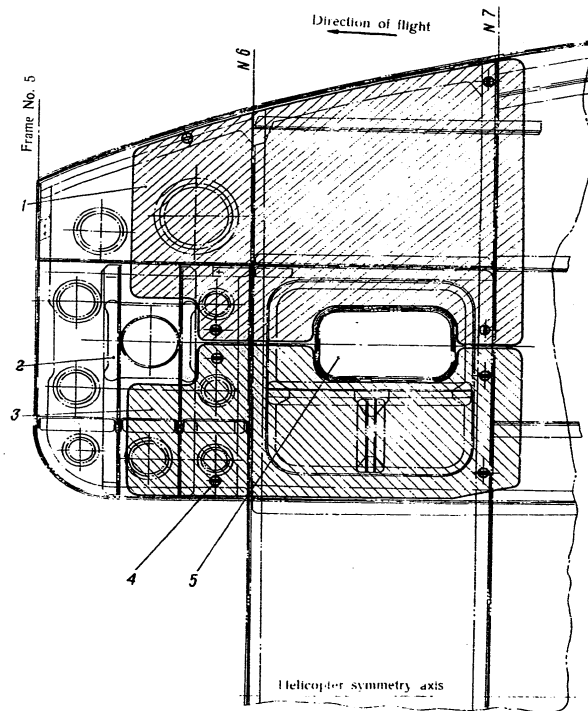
Arrangement of Armour Plates on Floor of Pilots' Cabin
